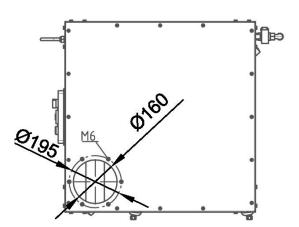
Dimensions of the filtering unit BIG-1000-R
